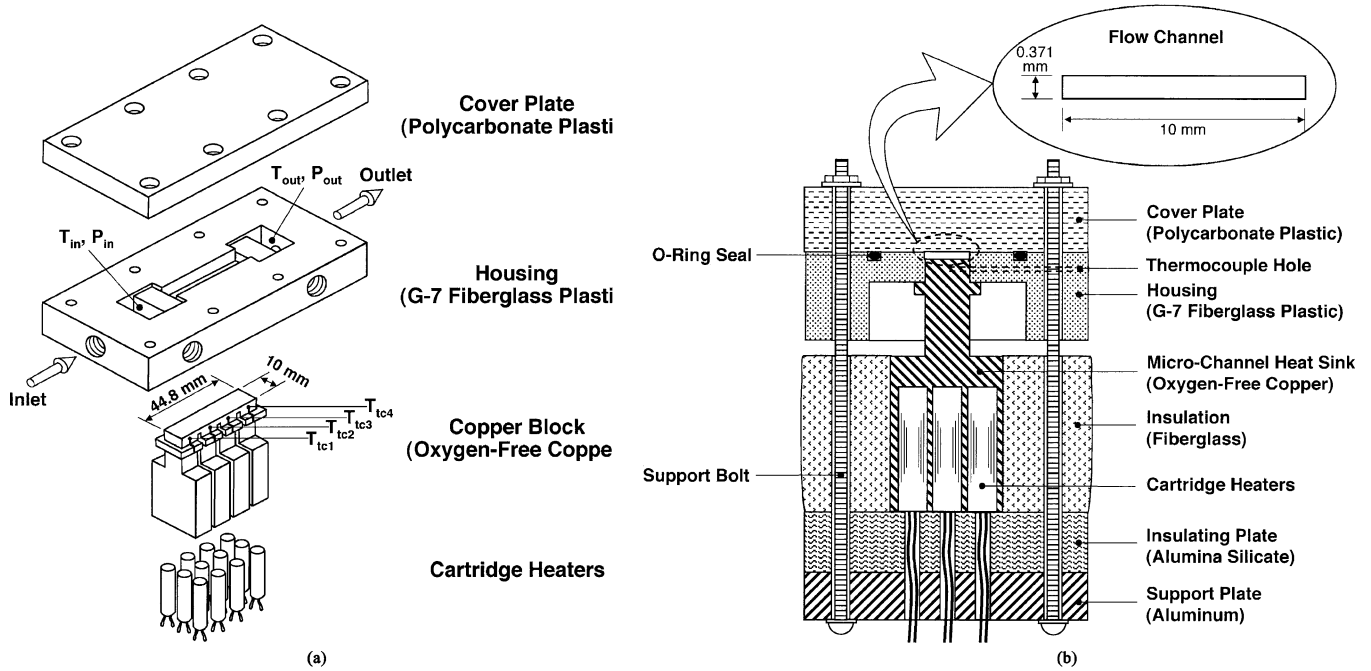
(a) Main parts and (b) sectional assembly view of test module.
